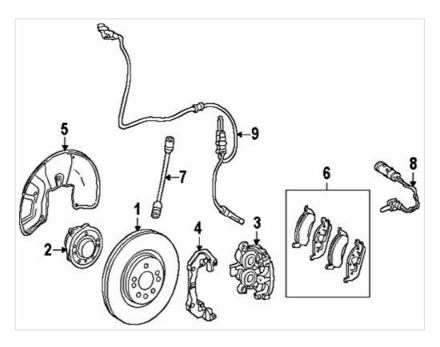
Exploded view of typical disc brake components. This diagram illustrates the various parts of a disc brake system, including (1) brake disc, (2) wheel hub, (3) brake caliper, (4) caliper bracket, (5) dust shield, (6) brake pads, (7) brake hose, (8) brake wear sensor, and (9) ABS sensor cable. The Mercedes-Benz 166 421 01 81 is the disc brake caliper
